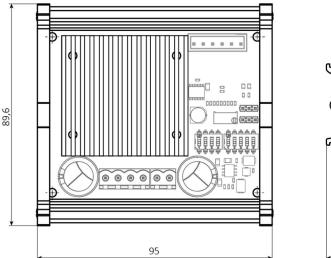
Dimensions of stepper motor driver SMD-8.0 open frame version
